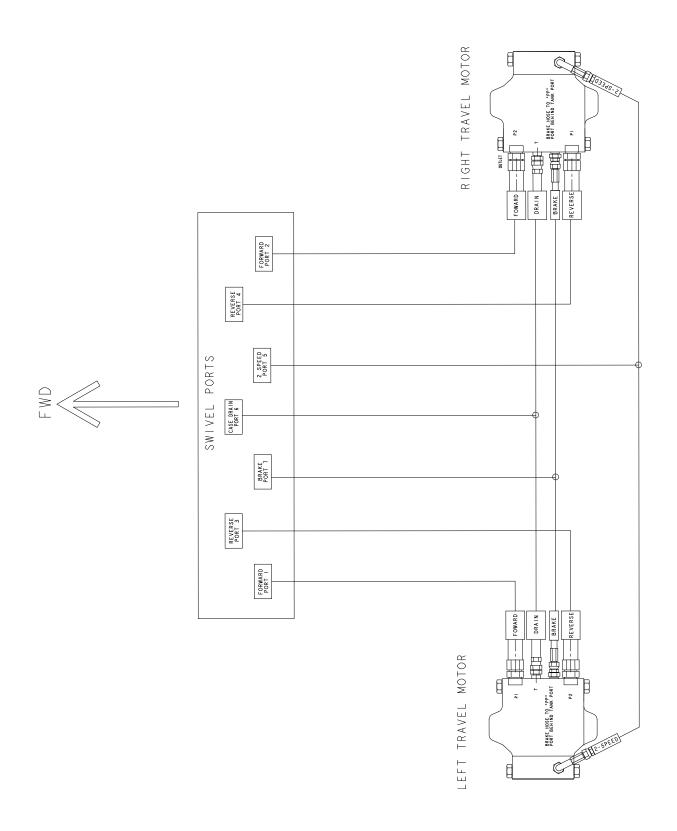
Crawler Drive Motor Hydraulic Schematic
